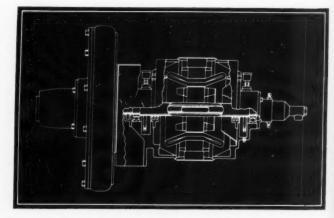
High speed motor is built into this oil burner to form a complete integral unit
